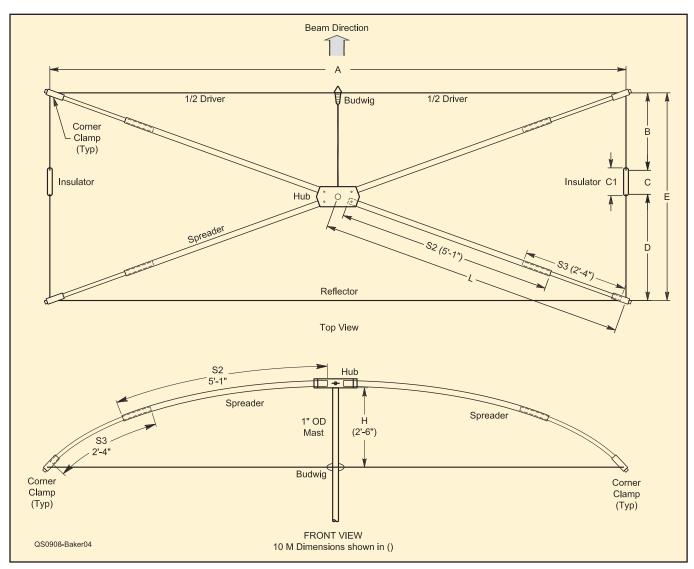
Dimensioned drawing of the 10 meter MoxBeam.
